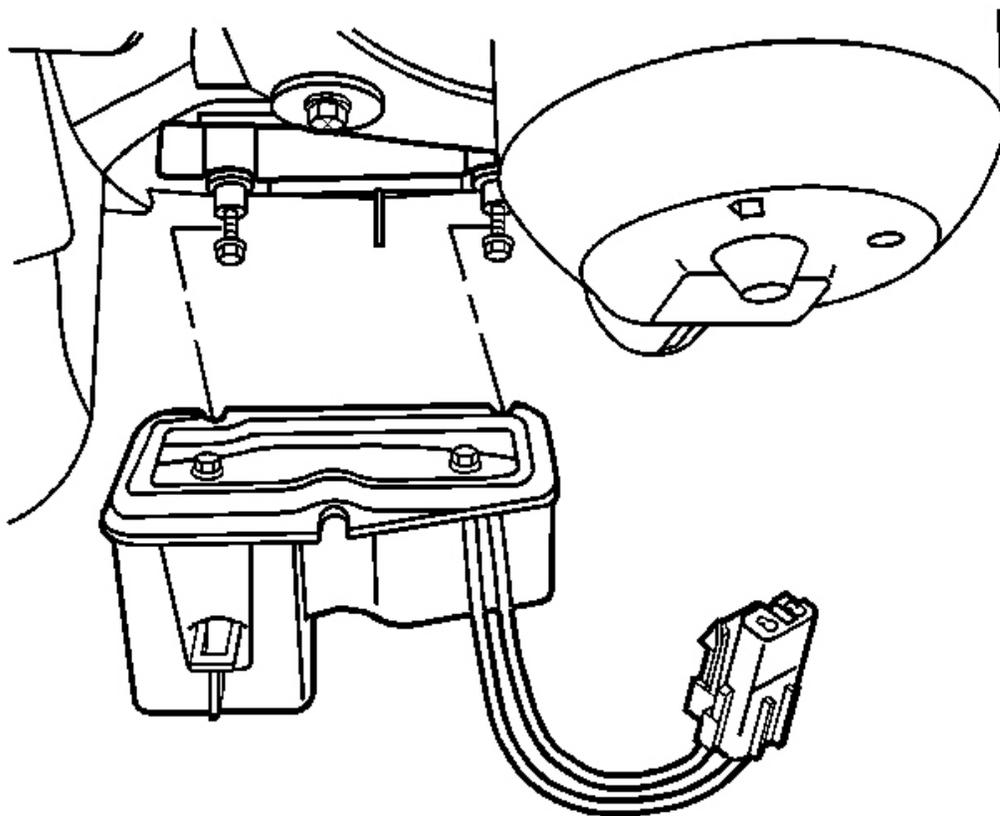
Rear Blower Motor Control Module & Retaining Screw
